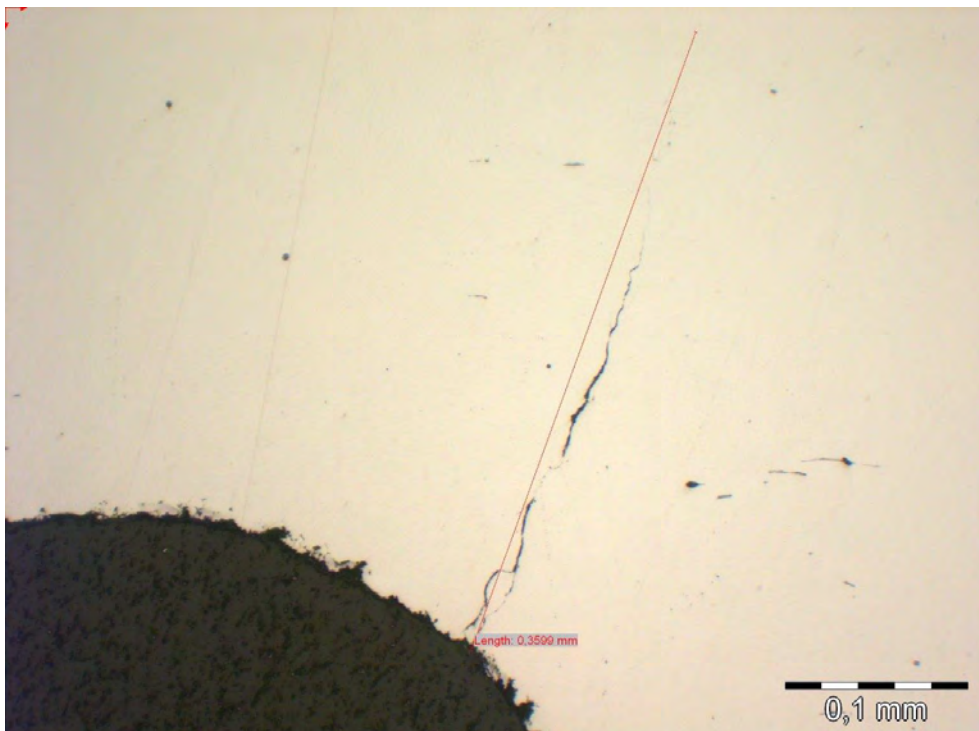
Cut six in crack at segment B, second ridge on barrel no. SFK 0120-A
